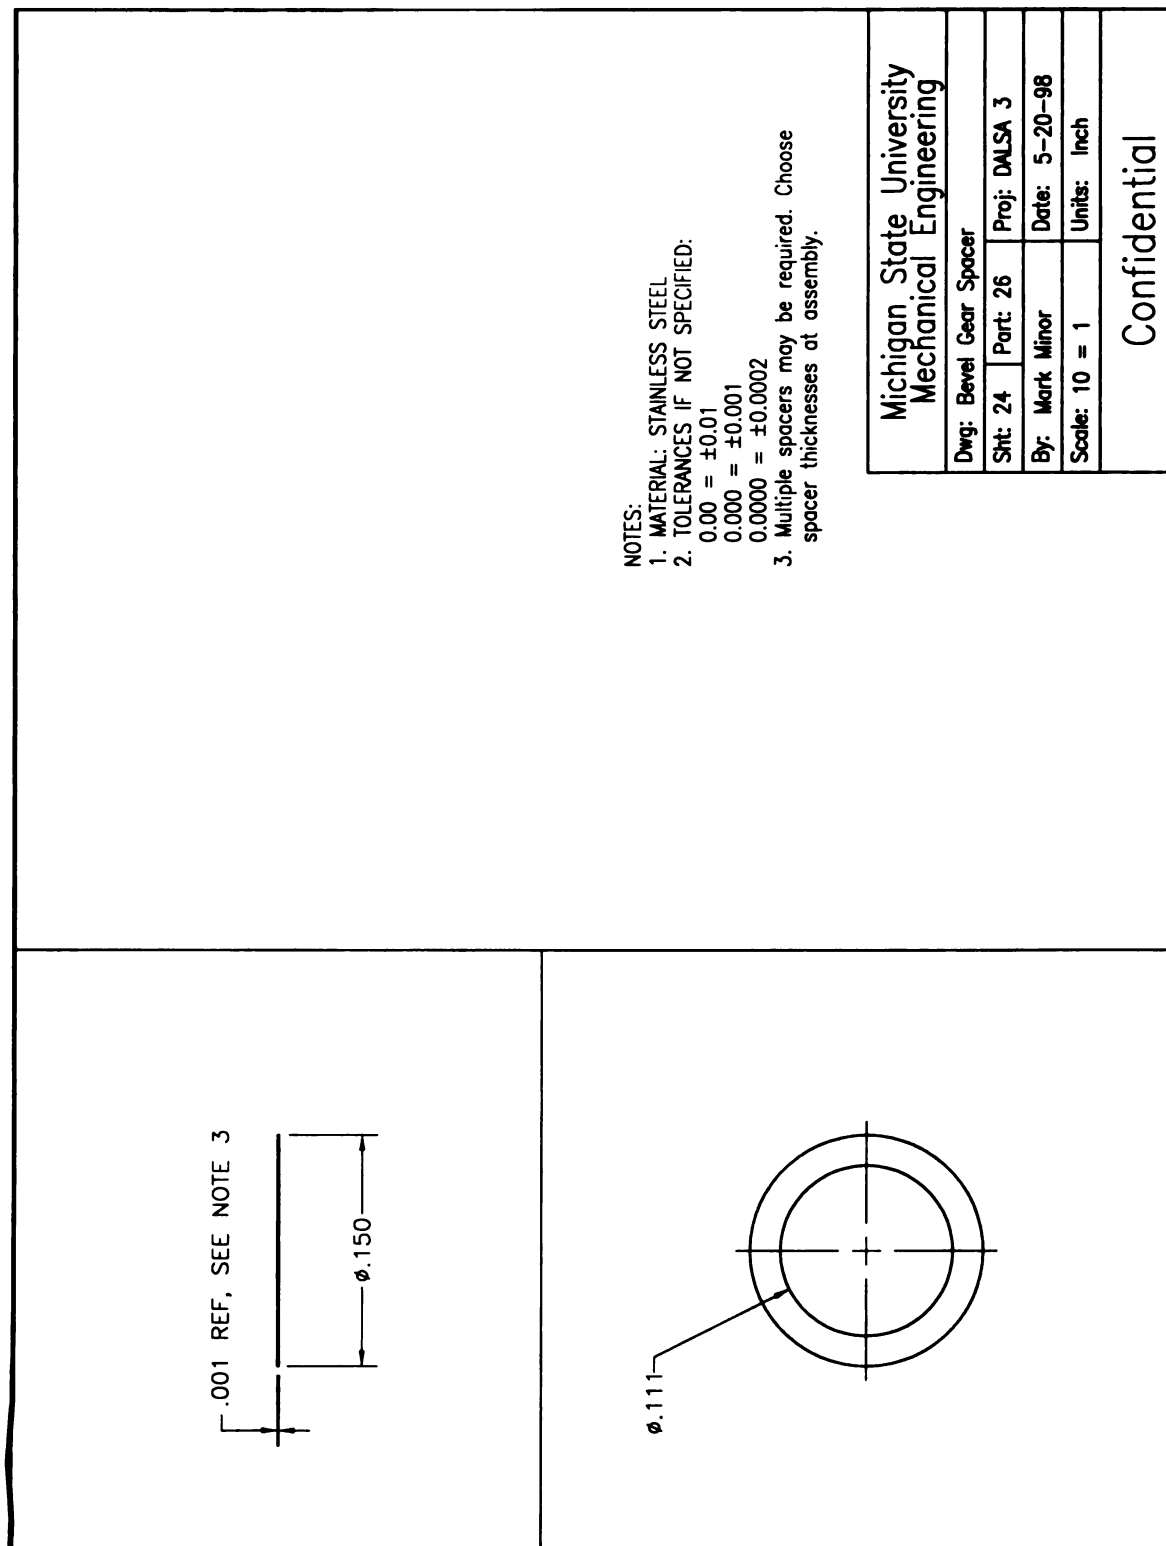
DALSA Component: Bevel Gear Spacer (sheet 24).
